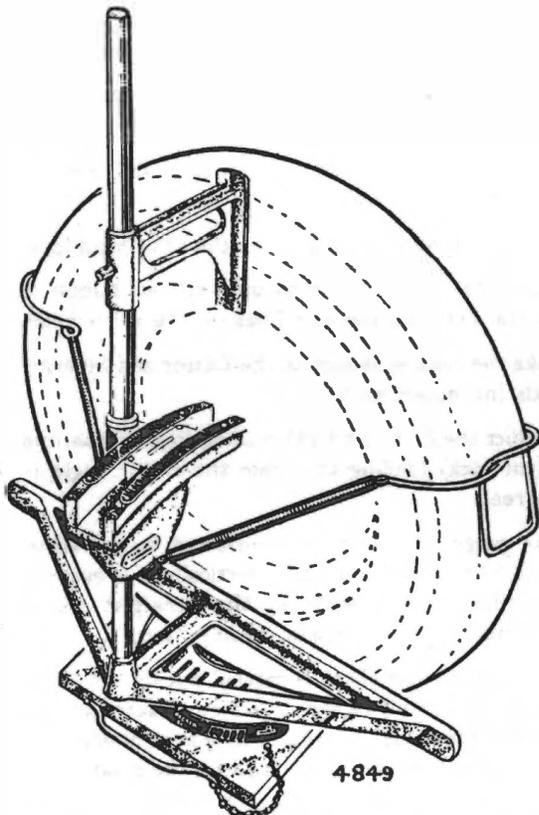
Churchill camber/astor gauge and turntable VLC.121U
